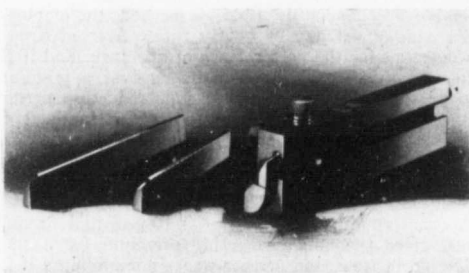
No-Clearance Tool for Standard Engine Lathe Tool Post With Three Cutters of Different Angles.
